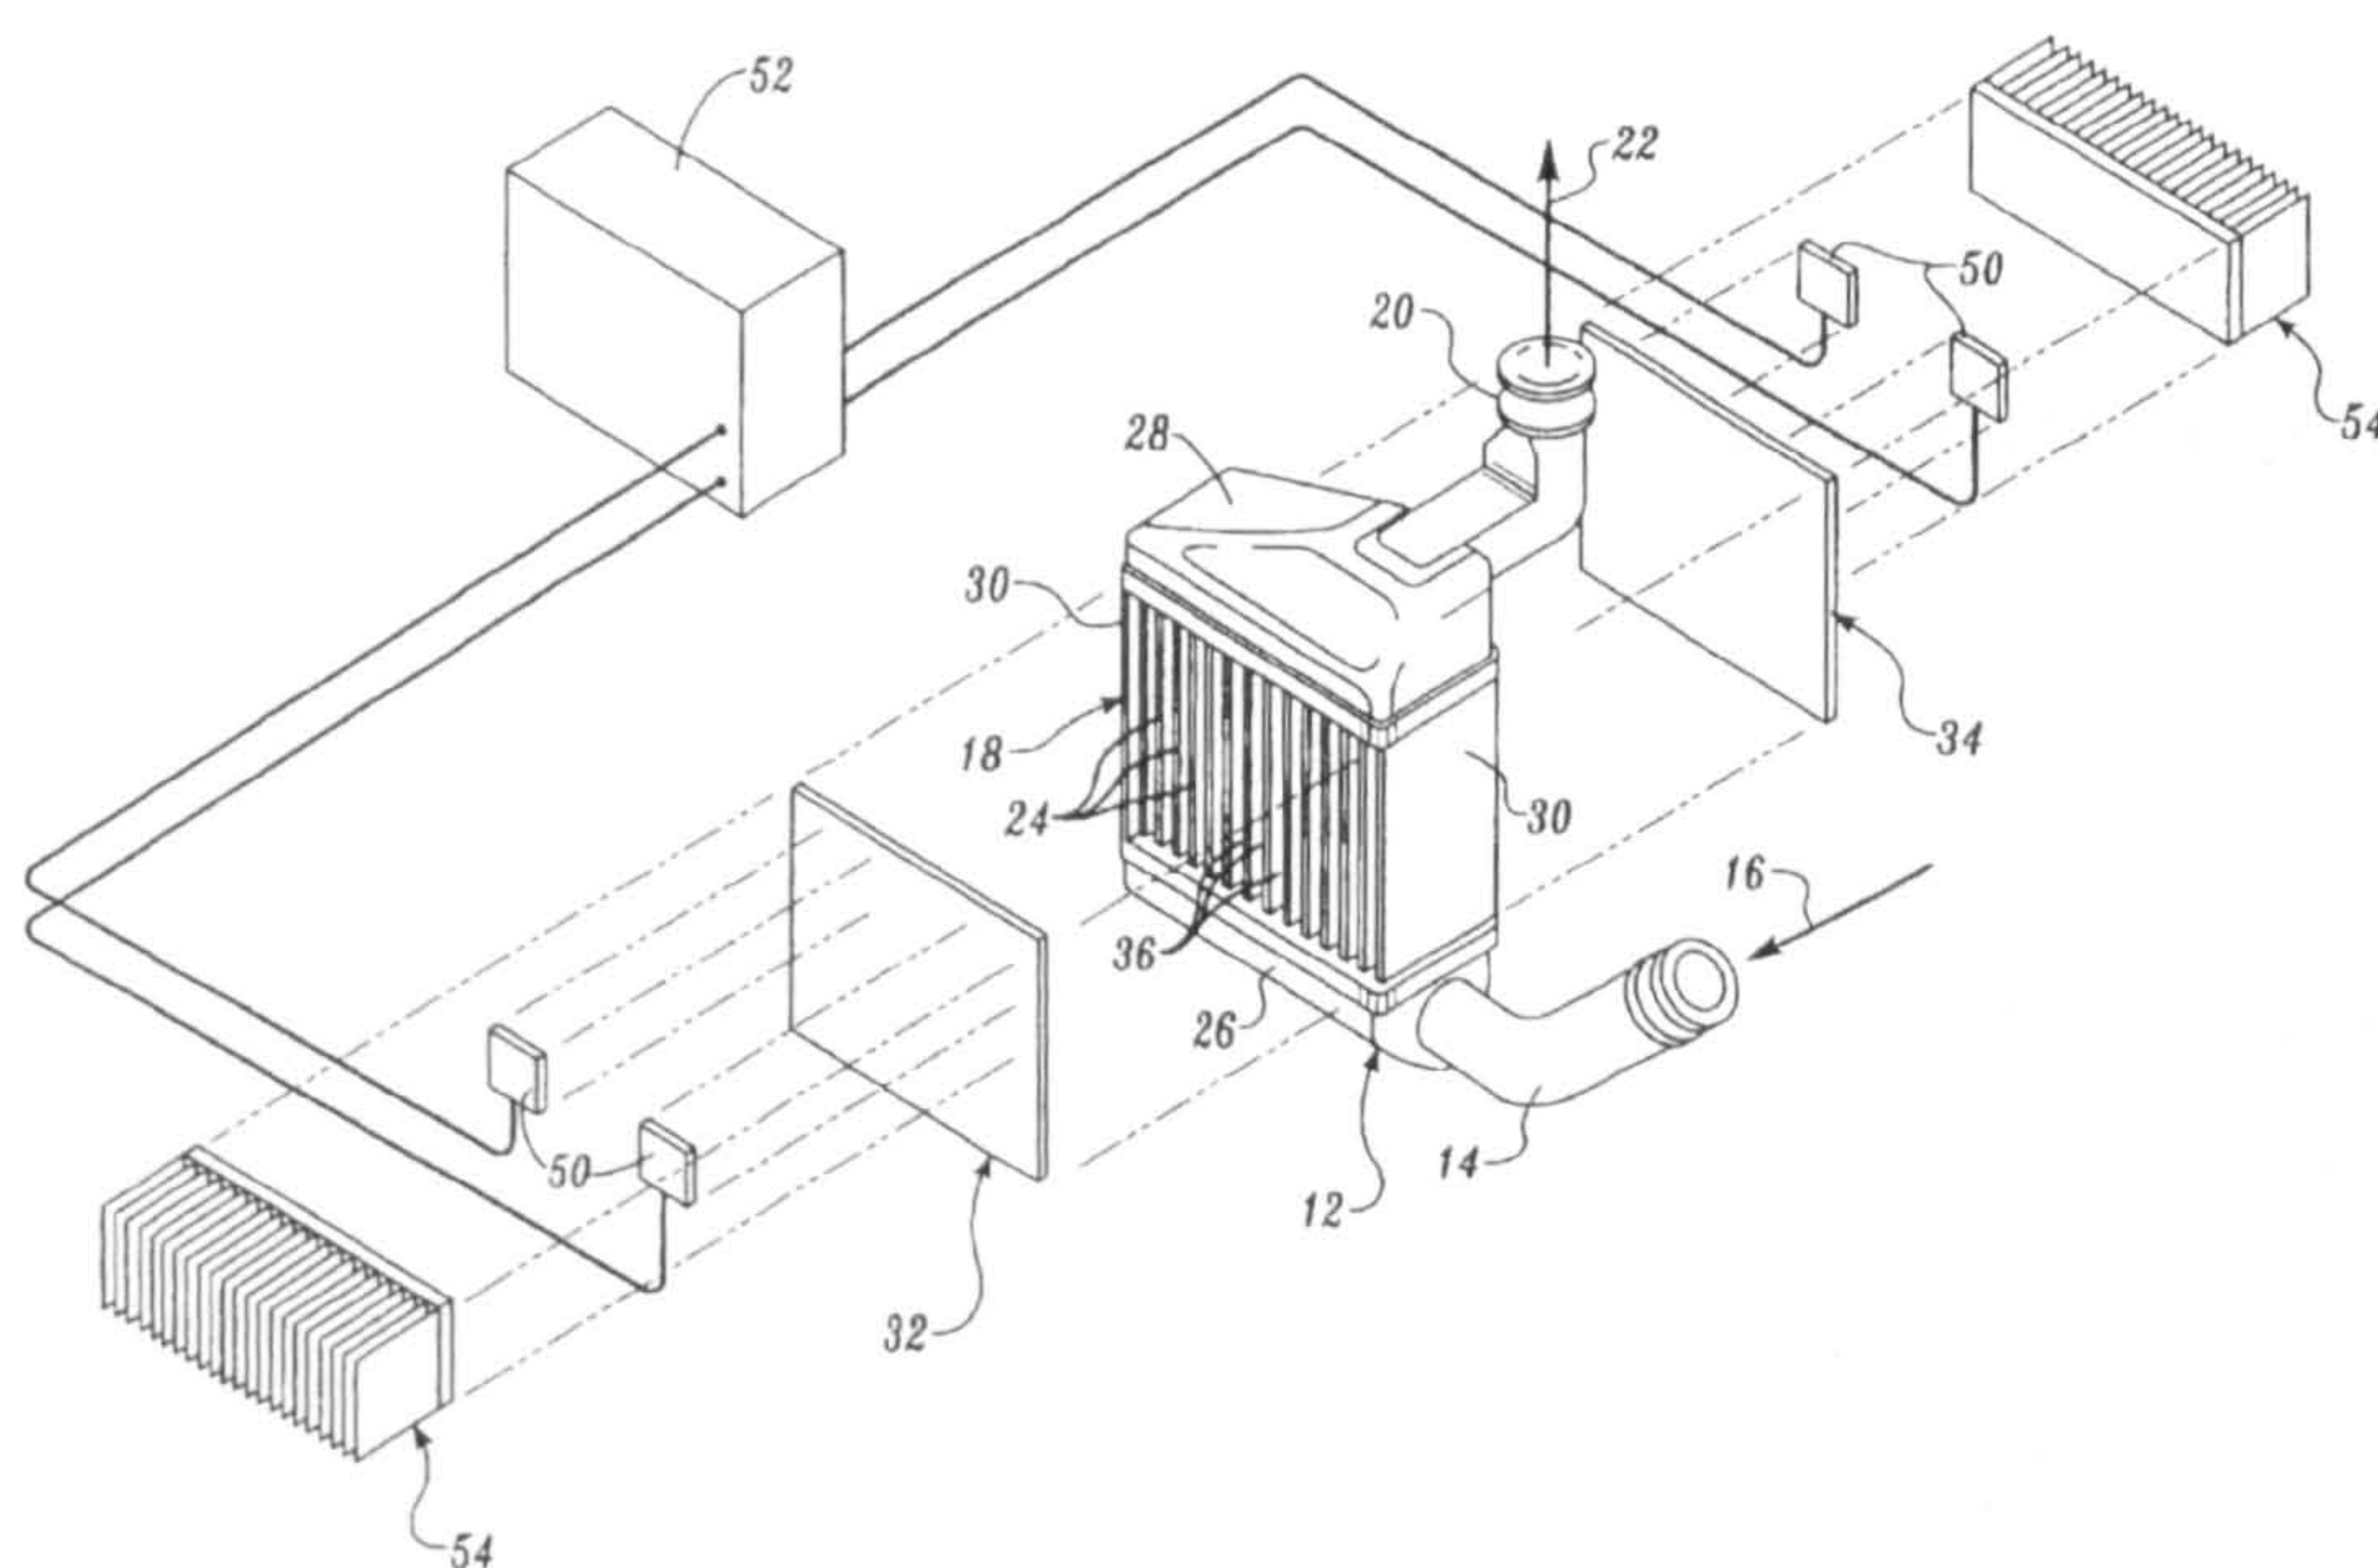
Schematic diagram of thermoelectric intercooler. (Explanation for the Figure: 12—Chamber; 14—Inlet pipe; 16—Fluid in; 18—Body of the chamber; 20—Outlet pipe; 22—Fluid out; 24—Tubes; 26—Bottom of chamber; 28—Top of chamber; 30—Side plate; 32—Front plate; 34—Back plate; 36—Interior; 50—Thermoelectric modules; 52—Control system; 54—Conductive heat sink. * This Figure is from United States Patent, 5547019) [Iacullo R. S, 1996]
